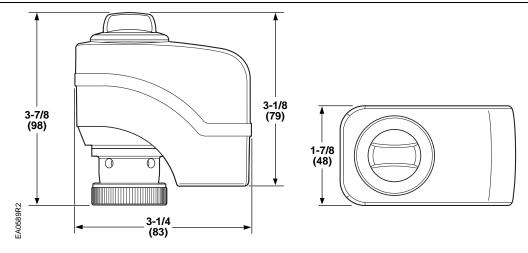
Dimensions of the SSB Actuator. Dimensions Shown in Inches (Millimeters).
